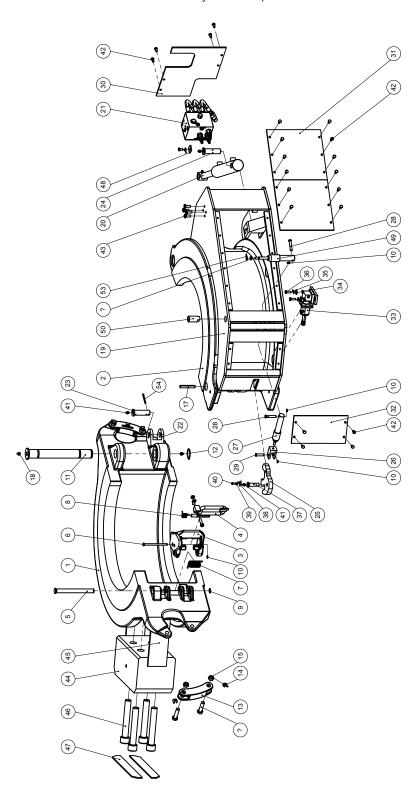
641620-Y-BC-H SDS 150-7 Hydraulic operated side door elevator I
